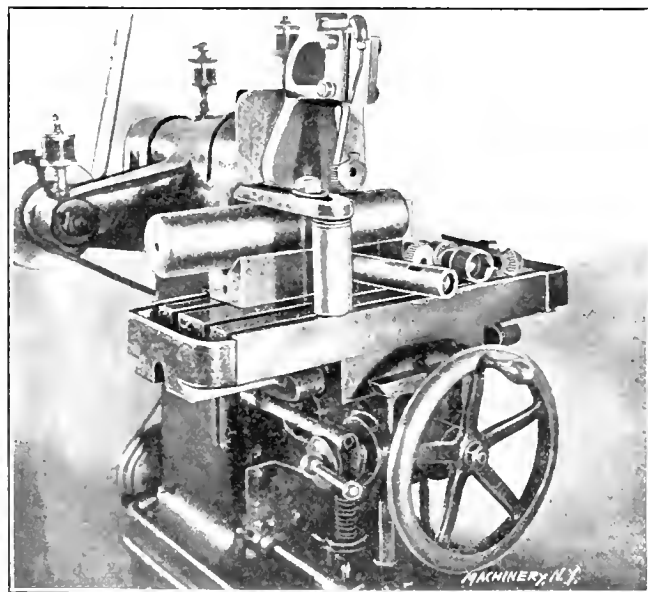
Cutting a Slot with the Oscillating Milling Machine.
